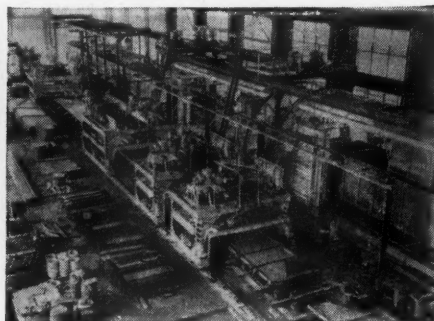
General view of car shop showing continuous-line production setup for weld-fabricating hopper cars.
